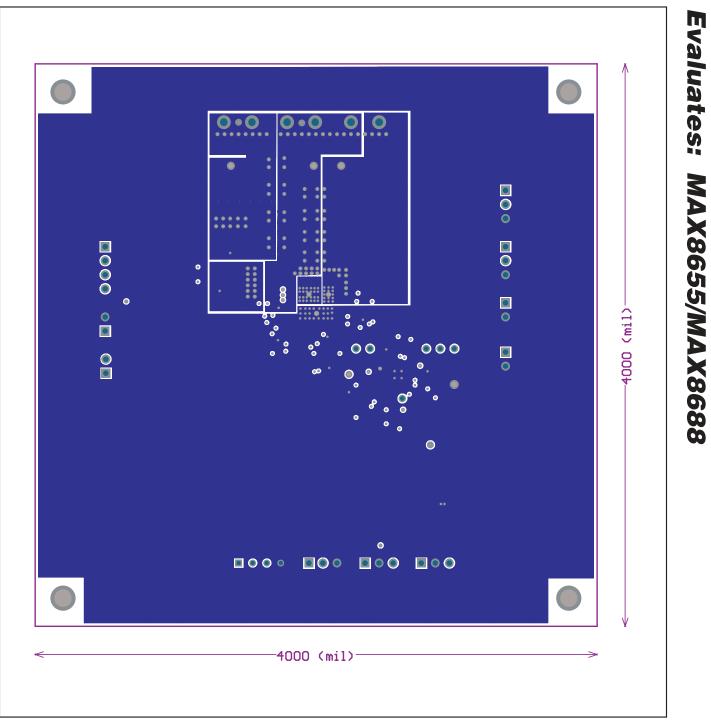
MAX8655 EV Kit PCB Layout—Inner Layer 4
